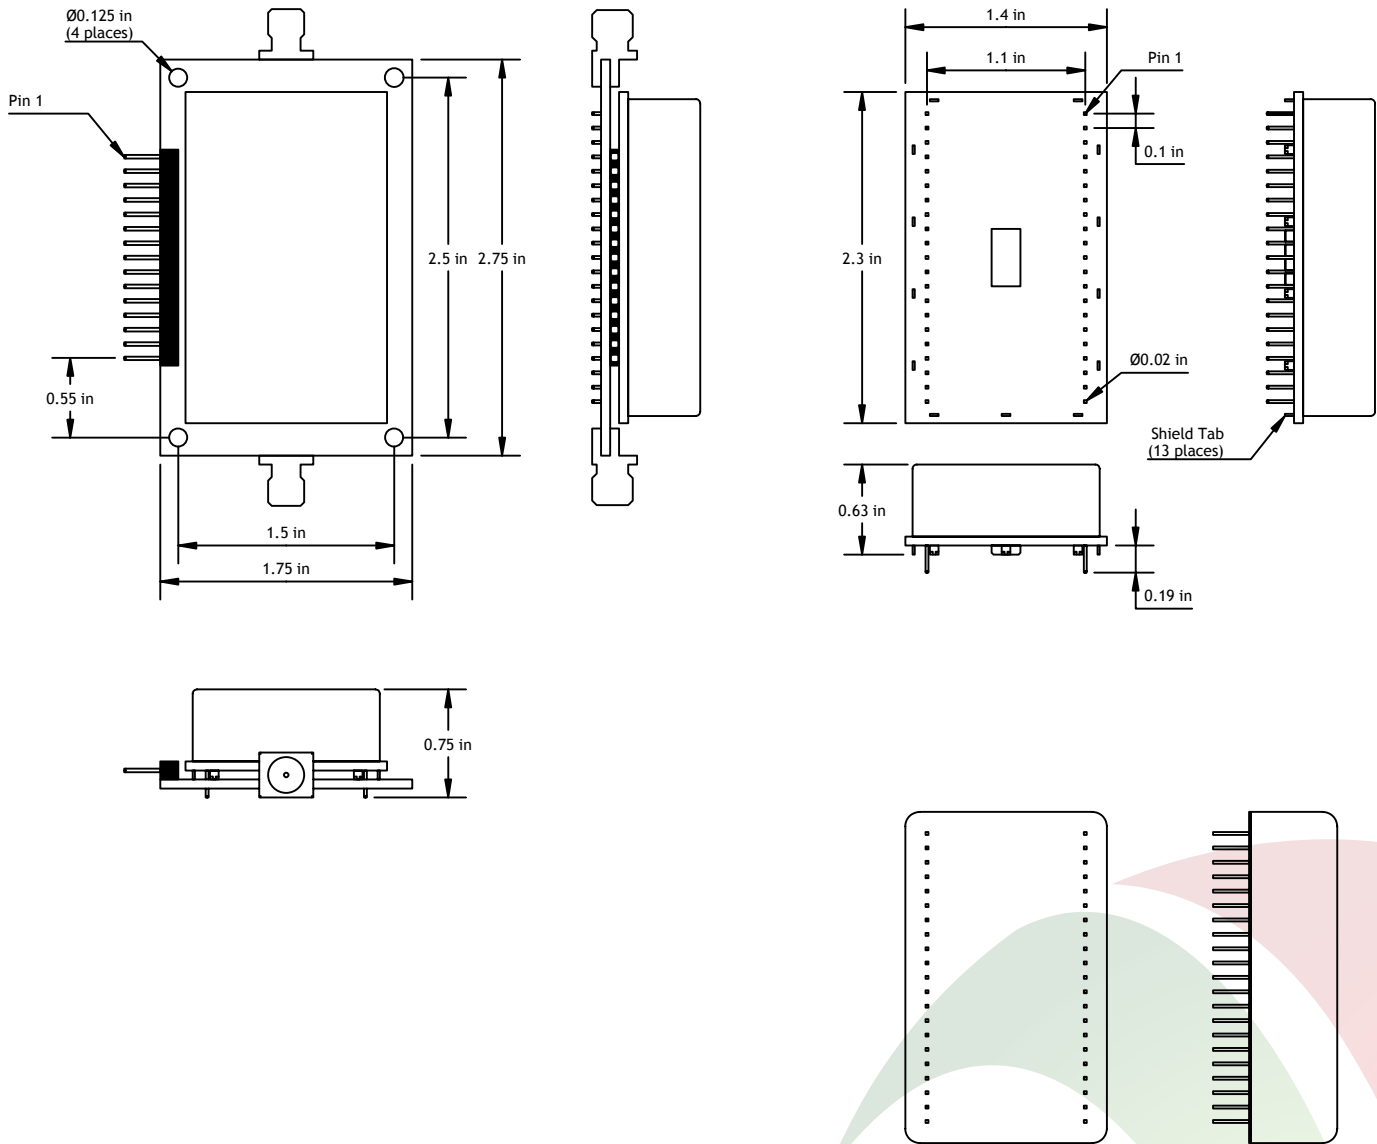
(left) Connectorized SMA package, (right) Board-mount package
